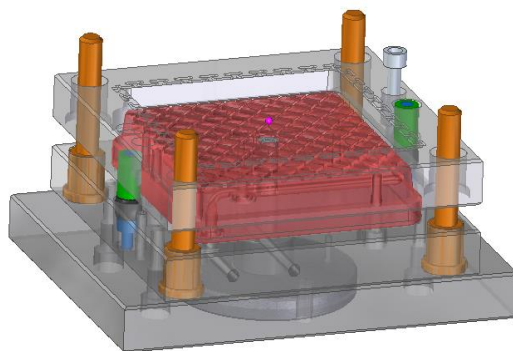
Fixed half of the injection mould, illustrating the ejection mechanism
